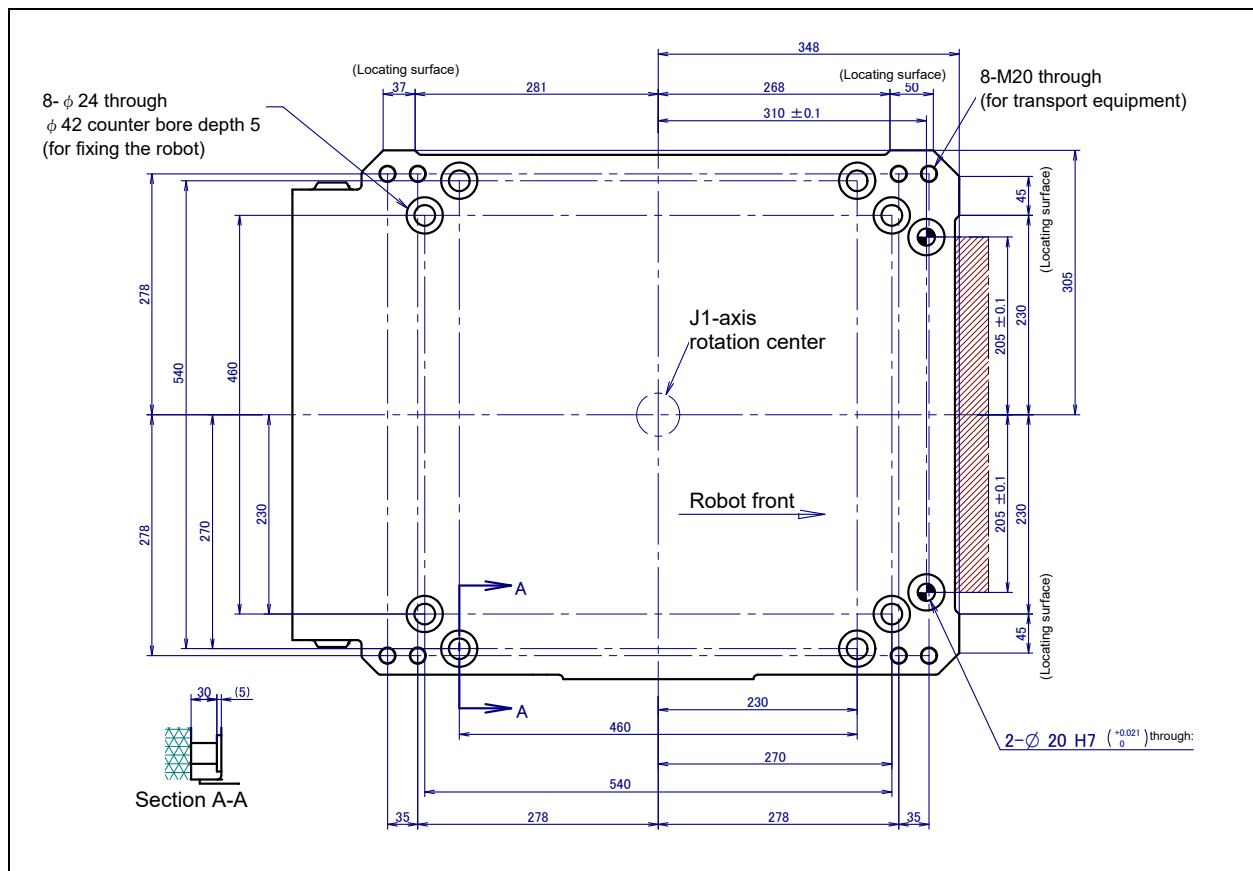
(a) Installation hole dimensions of the robot base (M-410iC/110)
